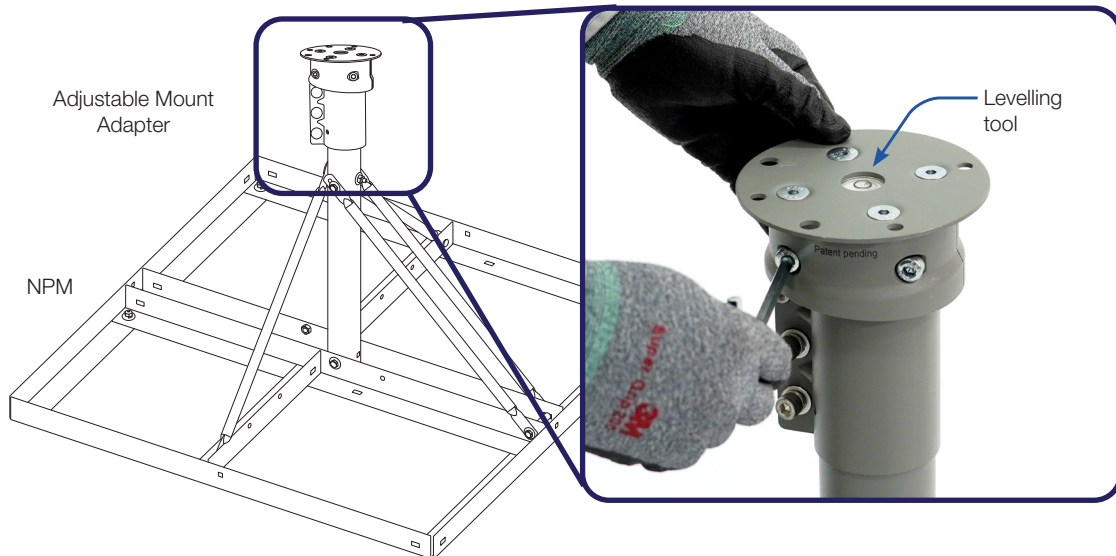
Loosen Bolts on Adjustable Mount Adapter
